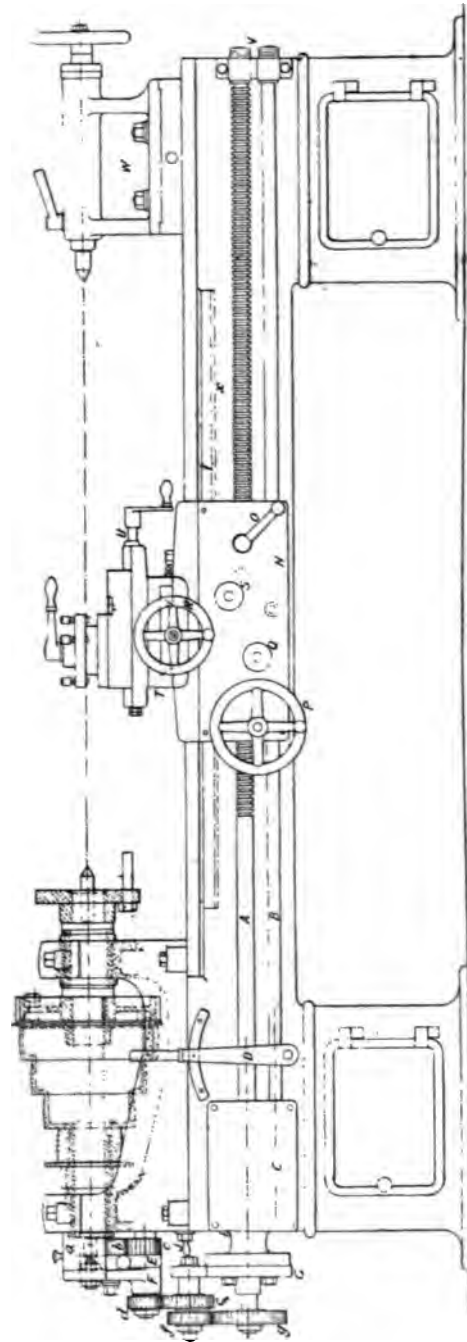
Screw-Cutting Lathe. (Front Elevation.)
